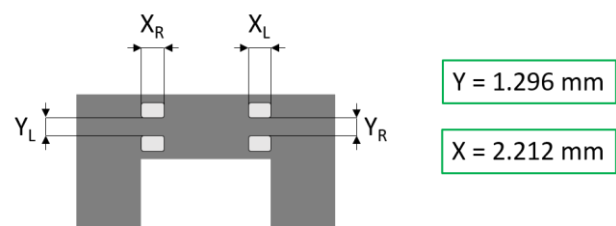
Polymer component scheme and measured dimensions. The part nominal dimensions are shown.
